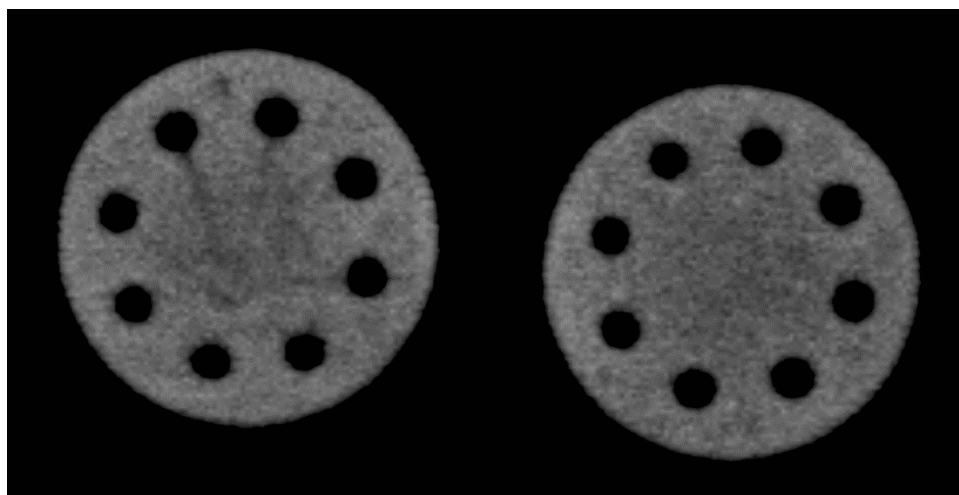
X-Ray images of the 98% extruded alumina revealed some samples had internal fractures that became evident after physical vapor deposition evaporation of platinum.
